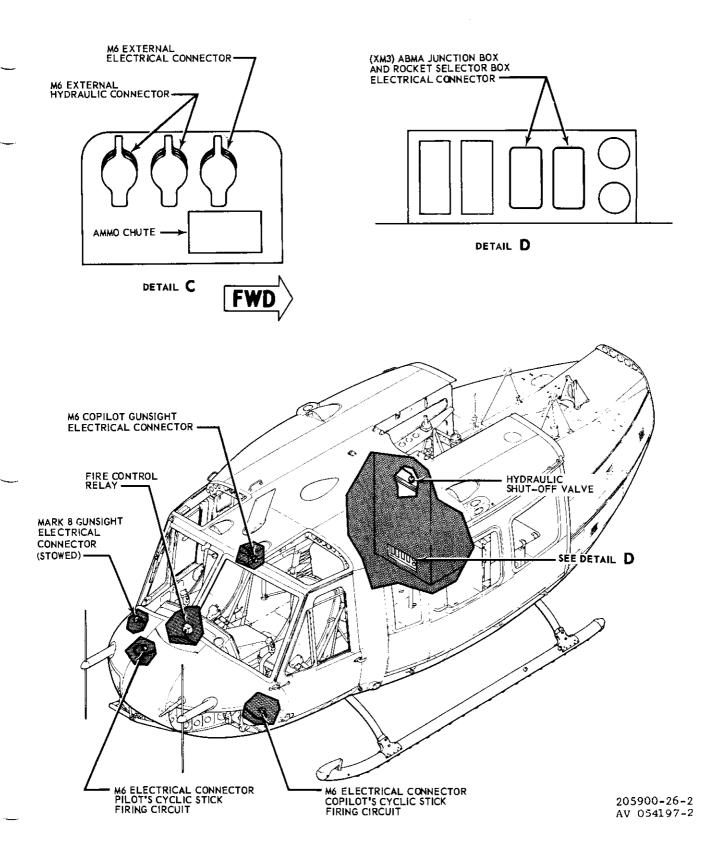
, External connections arm and fuel kit (Sheet 2 of 2)
